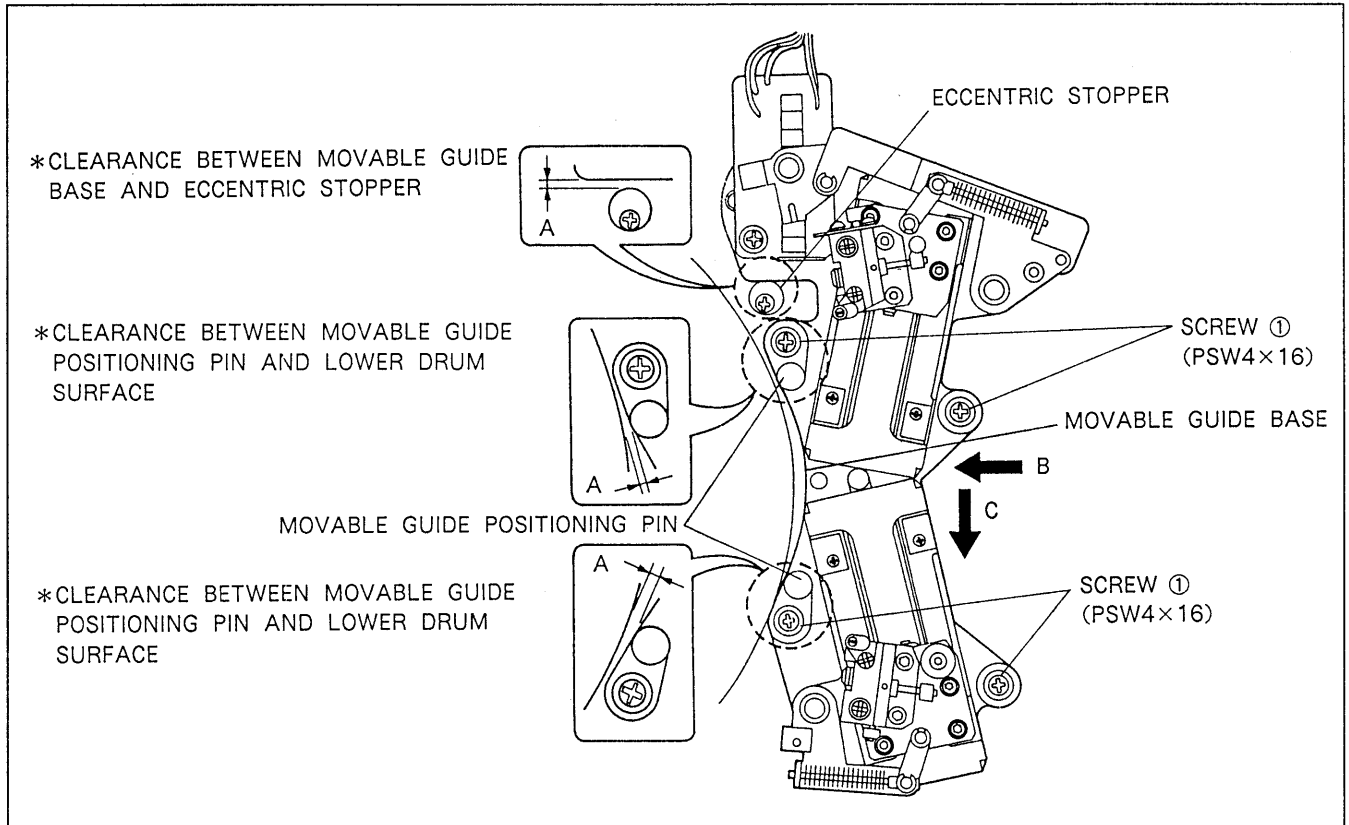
Installation Position Adjustment of Movable Guide Assembly
